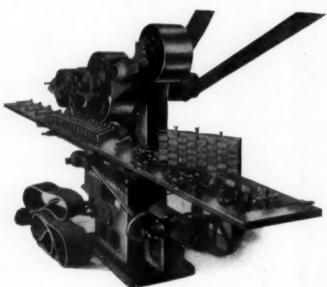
BLEVNEY TWO-BELT POLISHING MACHINE.
